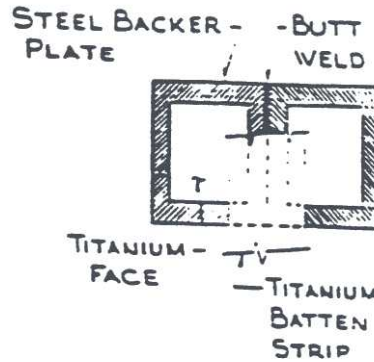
Typical titanium Resista-Clad Plate construction for new or total duct/vessel wall construction
